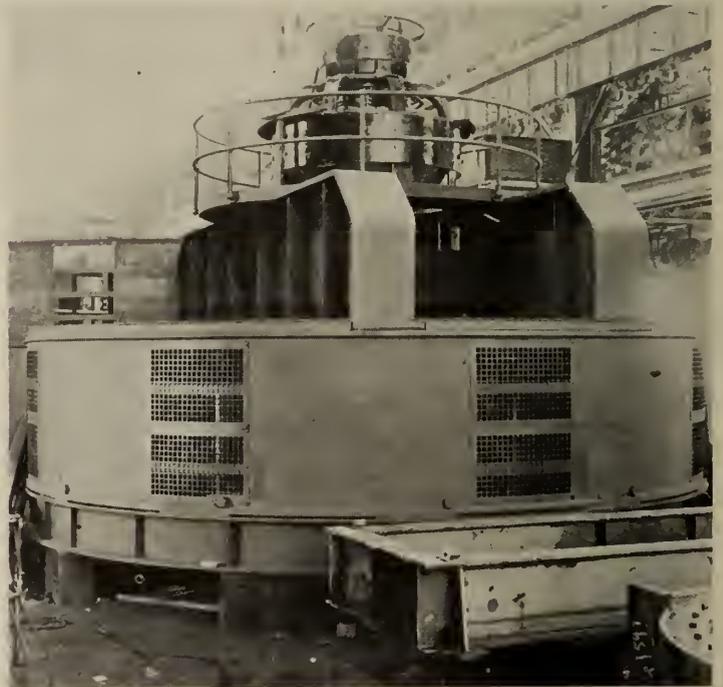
Arc Welded A.C. Generator, Canadian General Electric.
